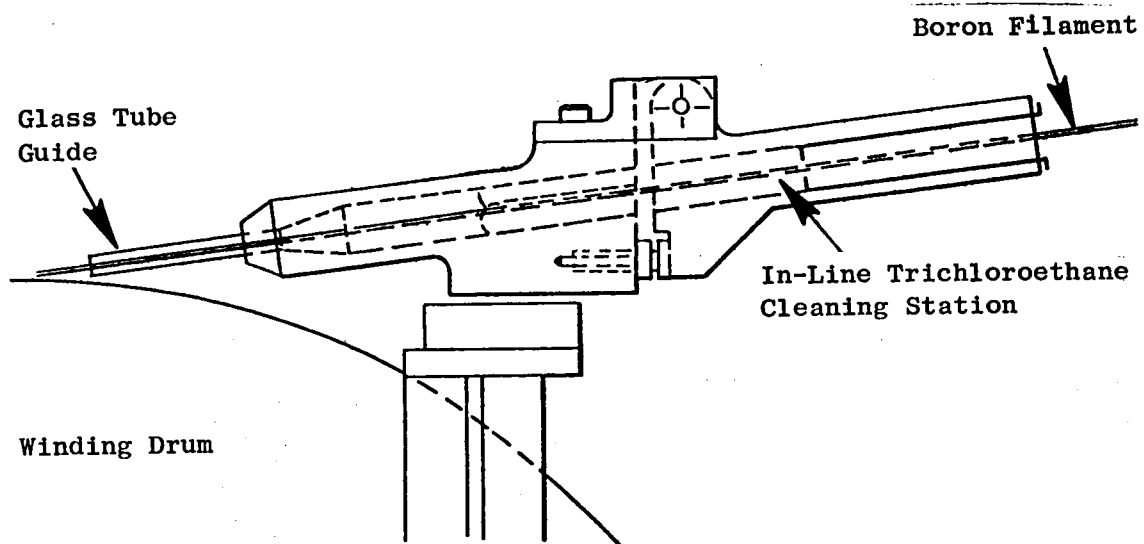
Schematic of the Wire Guide Assembly Used in Preparing the B/Al Tape.
